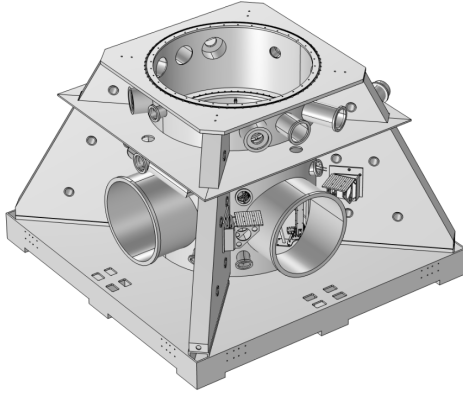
CAD drawing of the lower part of the West-End Virgo tower.
